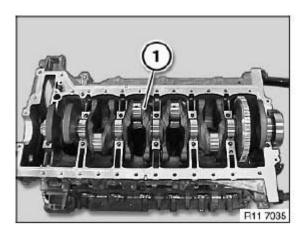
Identifying Crankshaft Courtesy of BMW OF NORTH AMERICA, INC.
